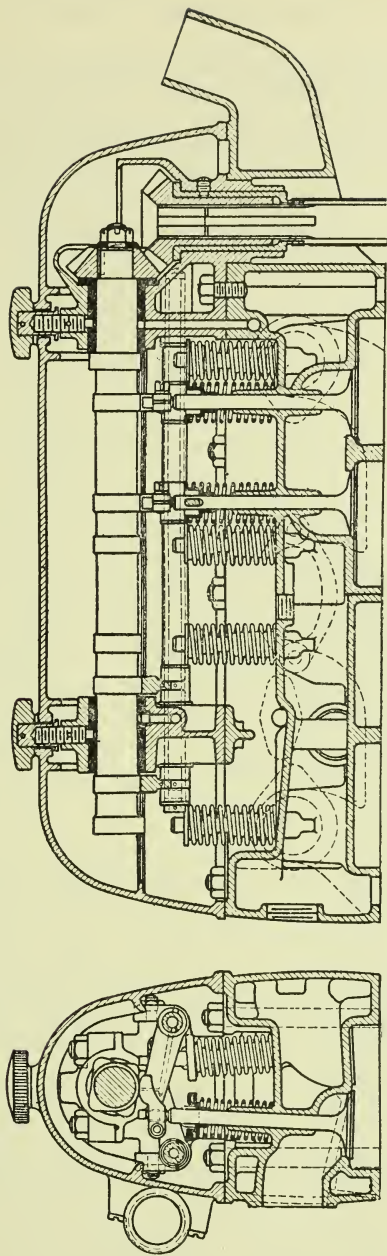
THE UPPER PORTION OF THE WOLSELEY OVERHEAD CAMSHAFT ENGINE
